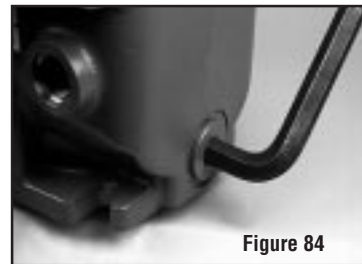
Install the lower clocking link retaining plug. Torque plugs to 125 ft. lbs. [169,5 Nm]. (see Figure 84)
